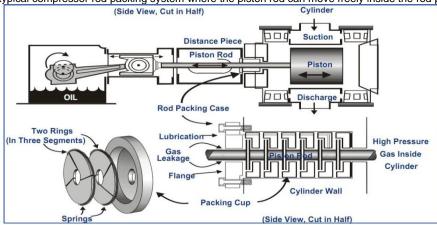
Compressor Rod Packing Schematic<sup>8</sup>
